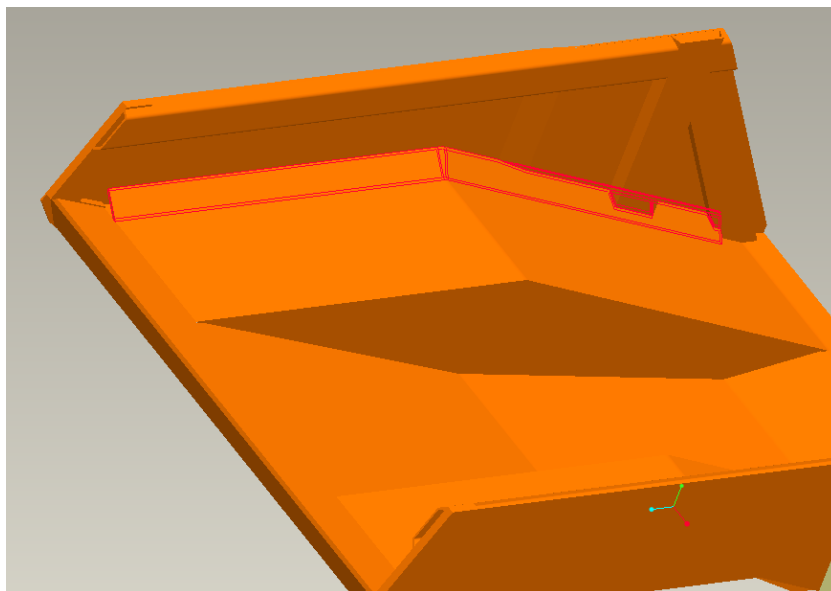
Concept 2 - The addition of the side wall to upper floor section reinforcement plate, marked in red color.
